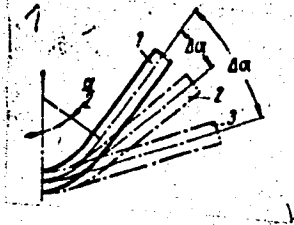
1- Specimen under load at the end of deformation process; α - bend angle; 2 - Specimen after load removal, with the coating layer in the compressed bend zone; $\Delta\alpha$ - the spring action angle; 3 - Specimen after load removal, with the coating layer in the elongated zone.
